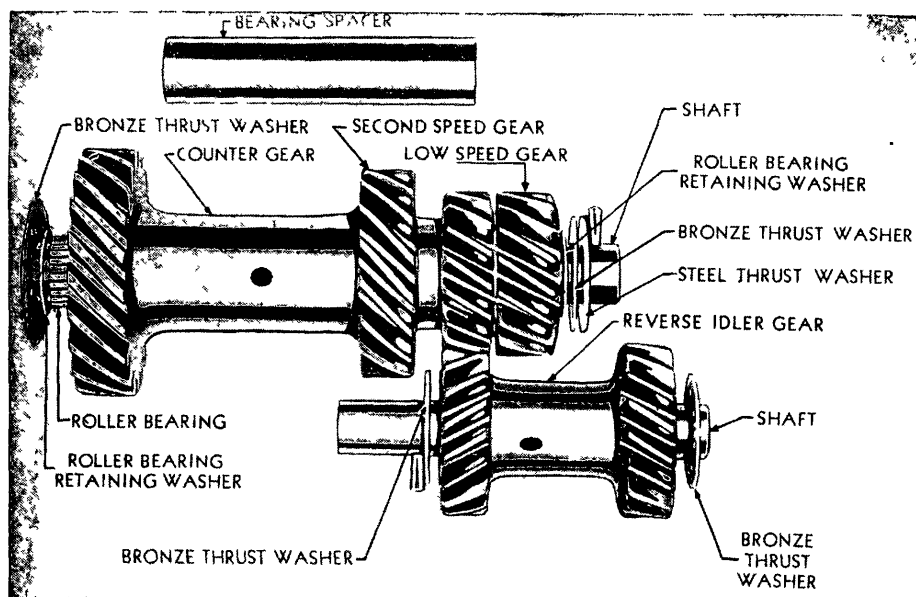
Arrangement of cluster gear and reverse idler gear parts.
